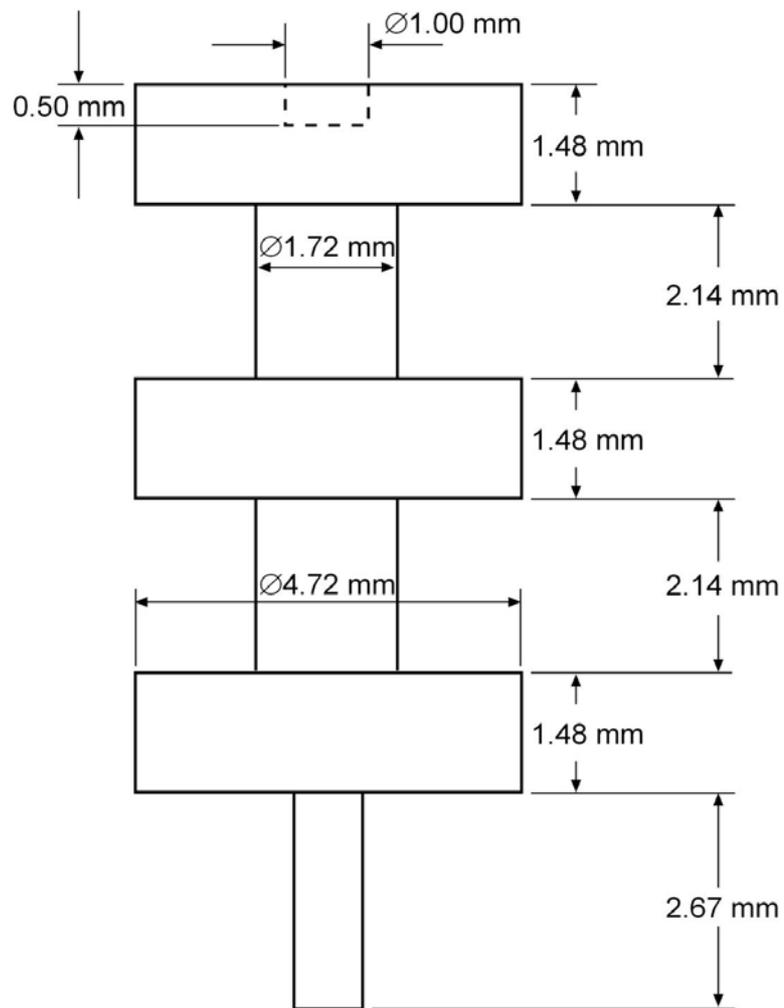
Two Dimensional Drawing of Filter Circuit with Post
